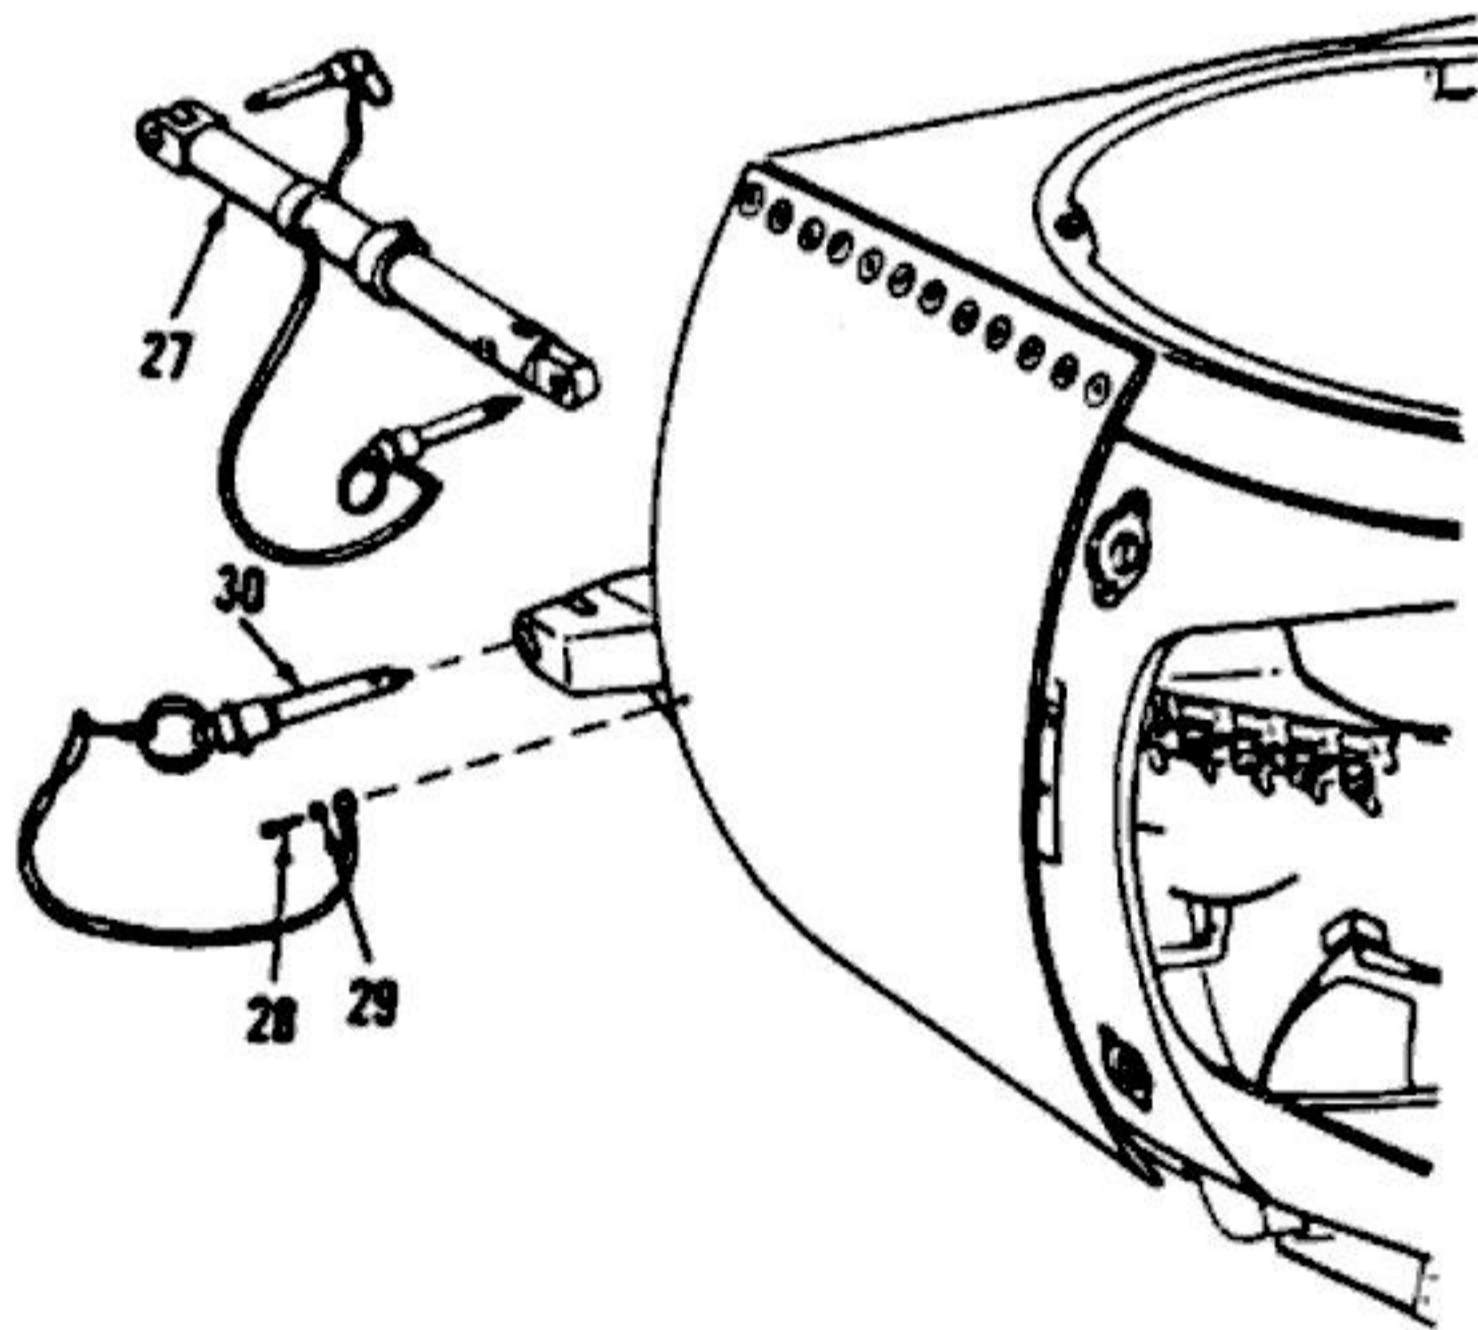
Turret assembly - partially exploded view (sheet 1 of 3).
